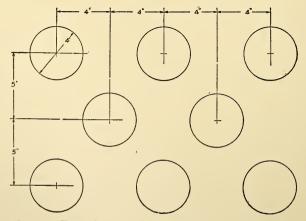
TUBE SPACING IN TYPES B AND D BOILERS.
